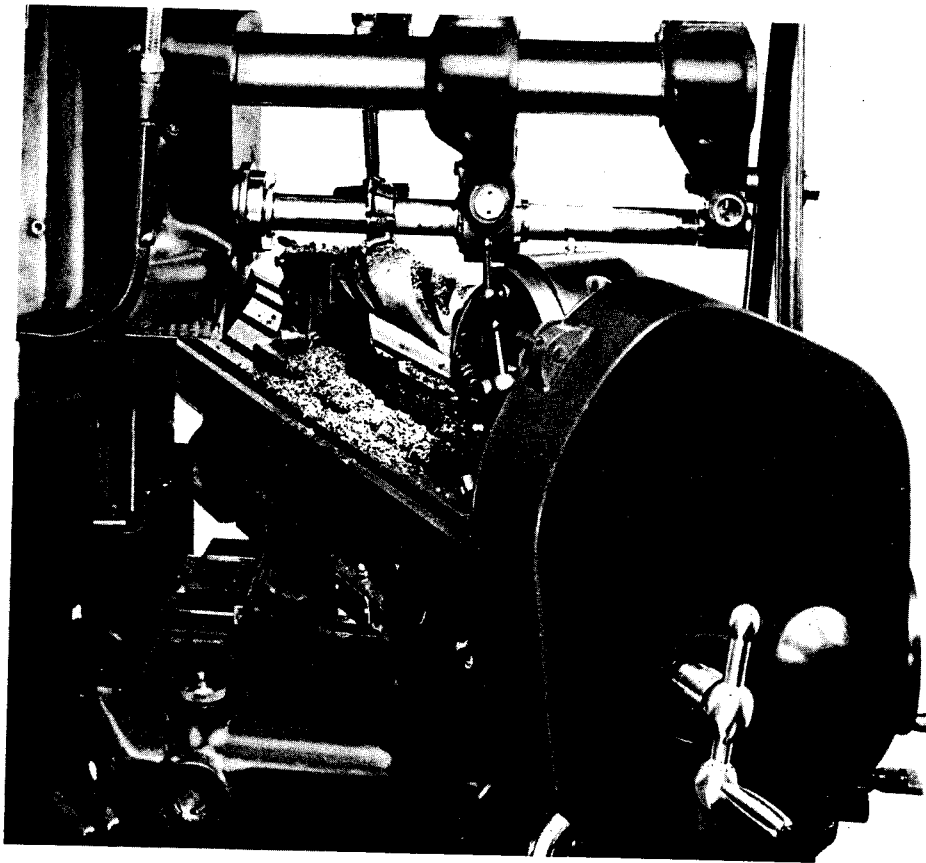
Cutting teeth in an arbor-type helical milling cutter. The arrangement of headstock gearing (here enclosed by Change Gear Guard) for proper lead and angle at which to set swivel table are taken from the charts furnished. On completion of a cut, the work is returned at fast travel to starting position and is plain-indexed for the next cut.
